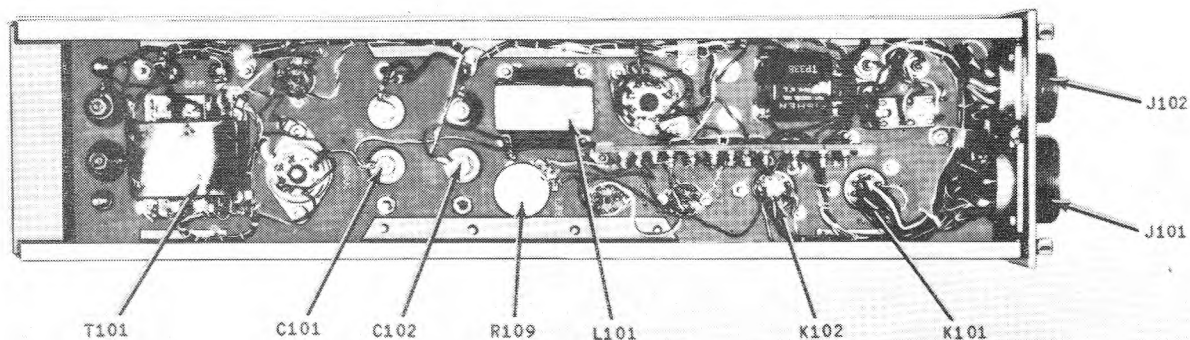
Power Supply PP-974/ALA-6, Bottom View of Chassis
